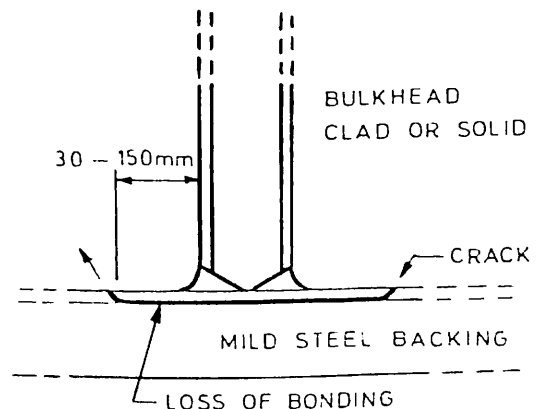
・18 Groove with full penetration is not recommended unless the cladding is removed in the weld area.
